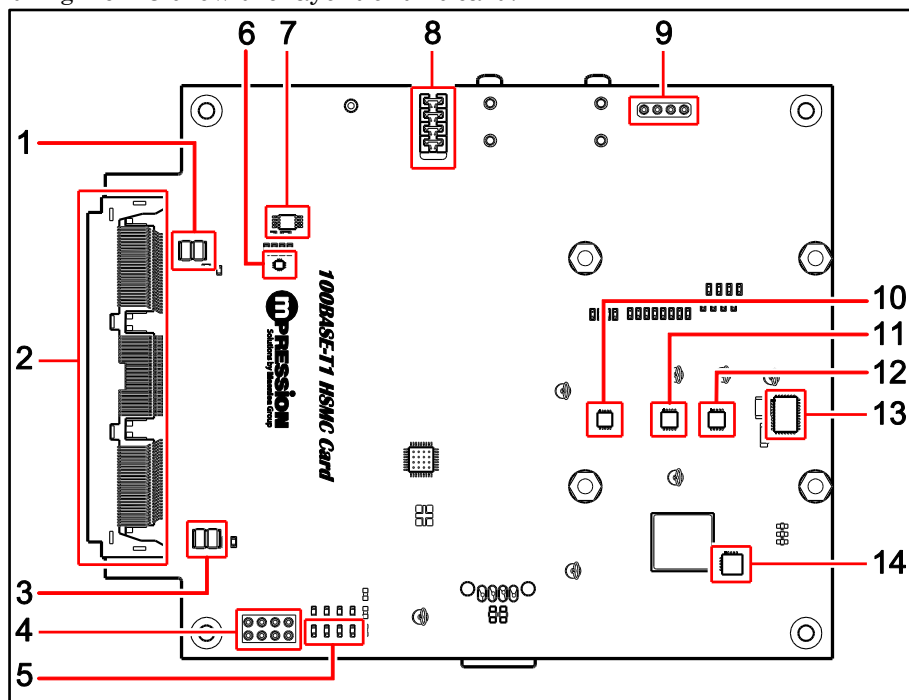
100BASE-T1 HSMC Card Layout (Top view)
